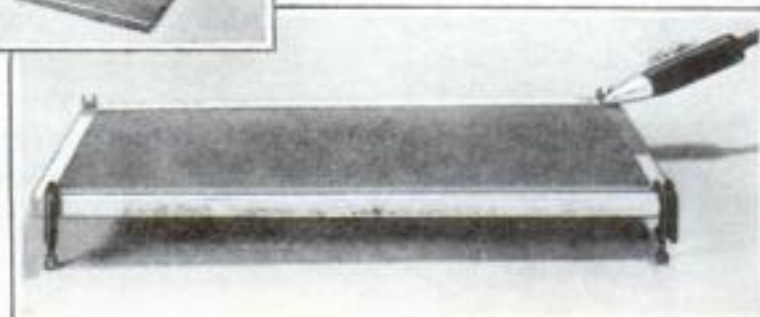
How the pieces for the top frame are clamped over the templates and soldered. The bottom is made in exactly the same way.
